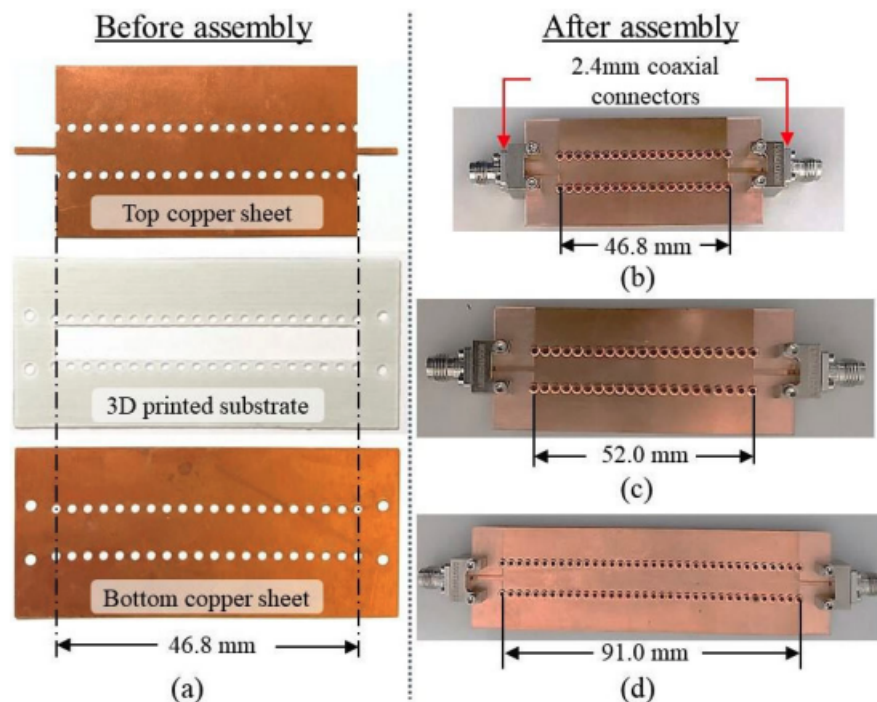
Fabricated HSIW prototype before and after assembly. (a) The 3D-printed HSIW is composed of the top and bottom laser-patterned copper sheets containing microstrip feed transitions and HSIW etch-hole array, and 3D printed ABS substrate with the total length of 46.8 mm. The right hand pictures show the fabricated HSIW after assembly with three different lengths of (b) 46.8 mm, (c) 52.0 mm, and (d) 91.0 mm, mounted with relaunched 2.4-mm coaxial connectors at the end of microstrip feed lines
